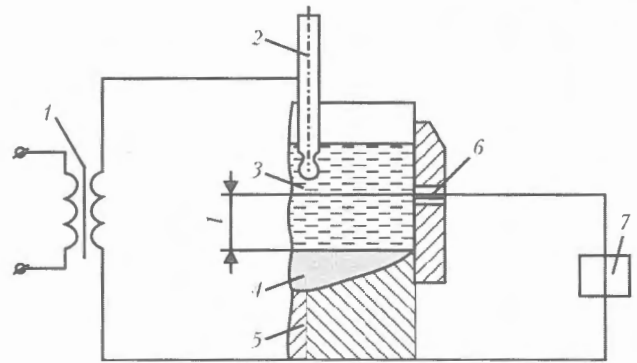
Diagram of device for removing shrinkage cavity: 1 – welding transformer; 2 – consumable electrode; 3, 4 – slag and weld pool, respectively; 5 – weld; 6 – probe; 7 – control
